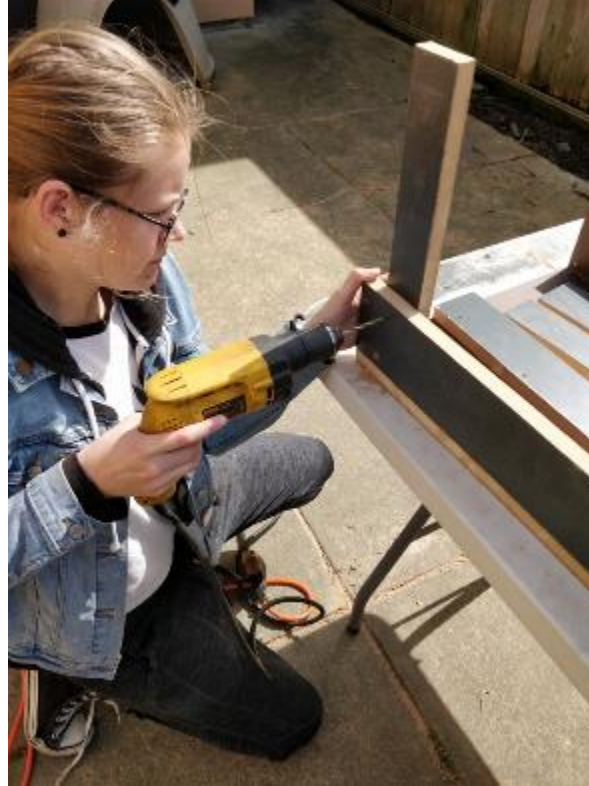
Elise screwing the cubbies together. (Robert Carey)
